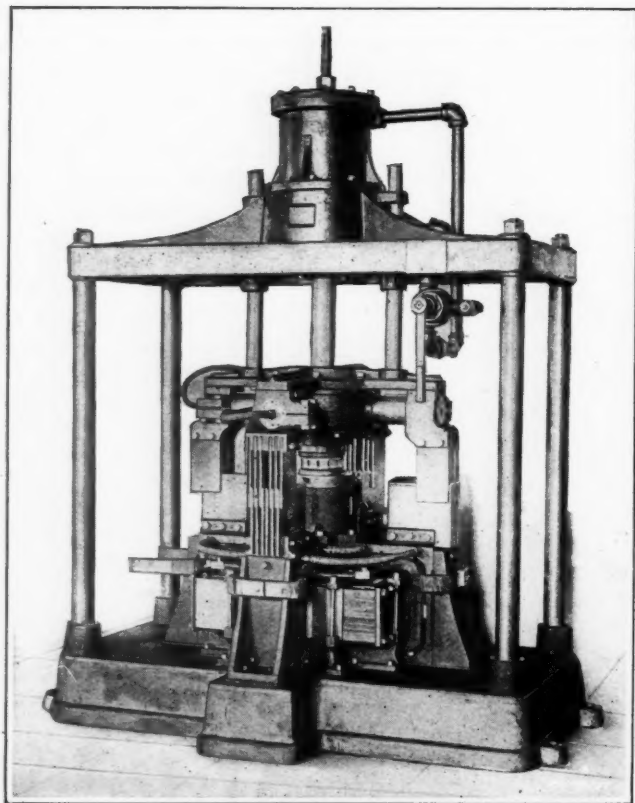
Hub and Spoke Welding Machine designed by the Thomson Electric Welding Co.
